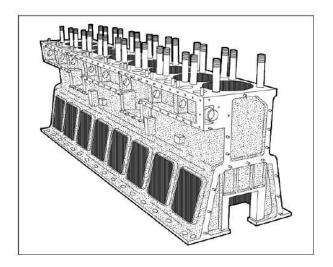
Diesel Engine Cylinder Block Source: (Gedeon, 2019)
